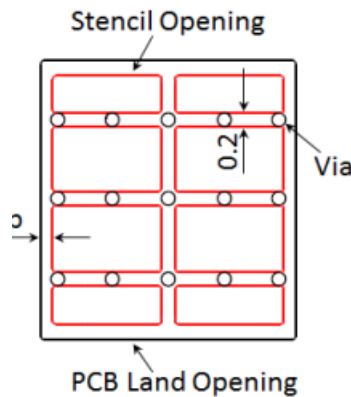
Stencil Openings Shall not Cover Via Areas If Possible
